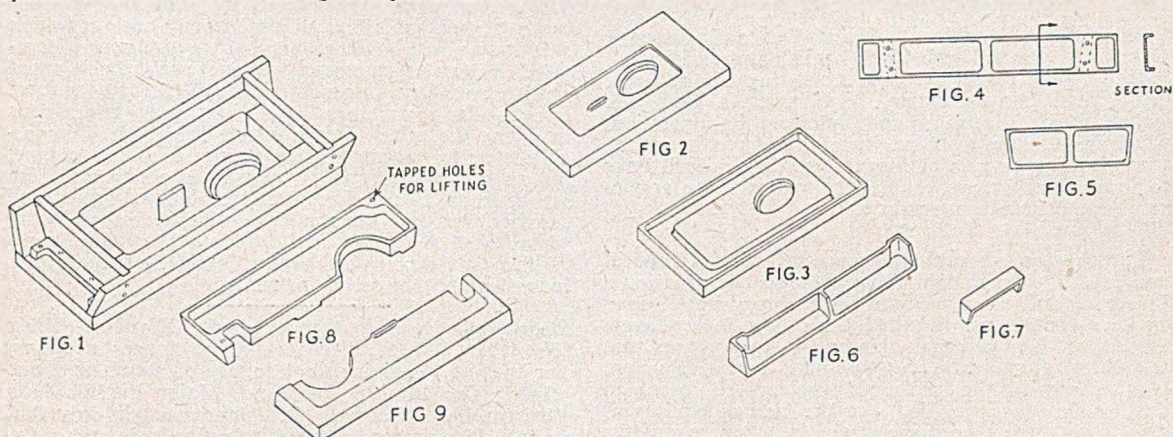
Completed Metal Corebox; Figs. 2 to 8 Component Parts and Fig. 9 Top Face of the Finished Core, the making of which is described.
